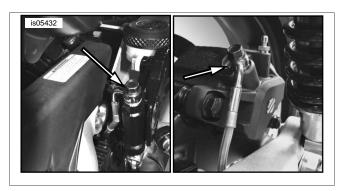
Master Cylinder and Caliper Housing Positive Stops
